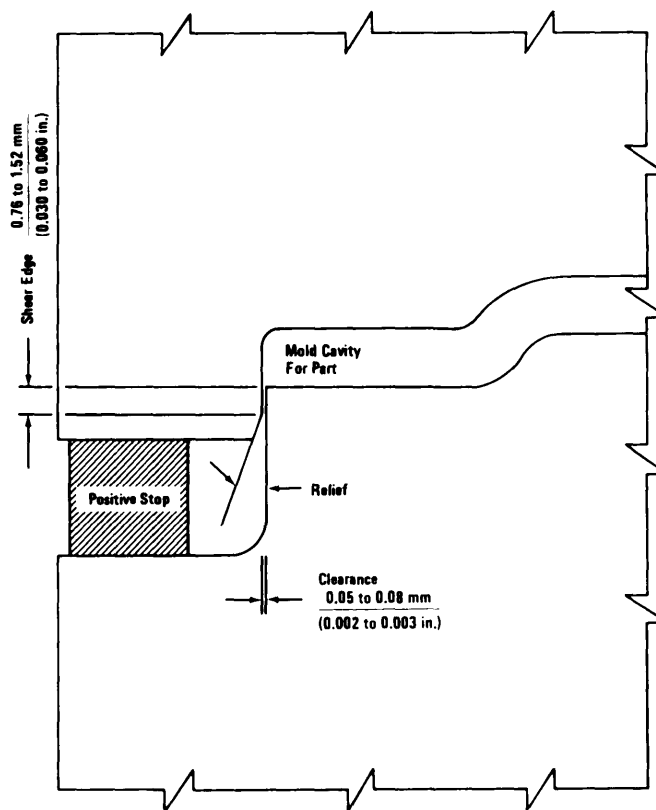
Semipositive Mold With Shear Edge (Ref. 20)
